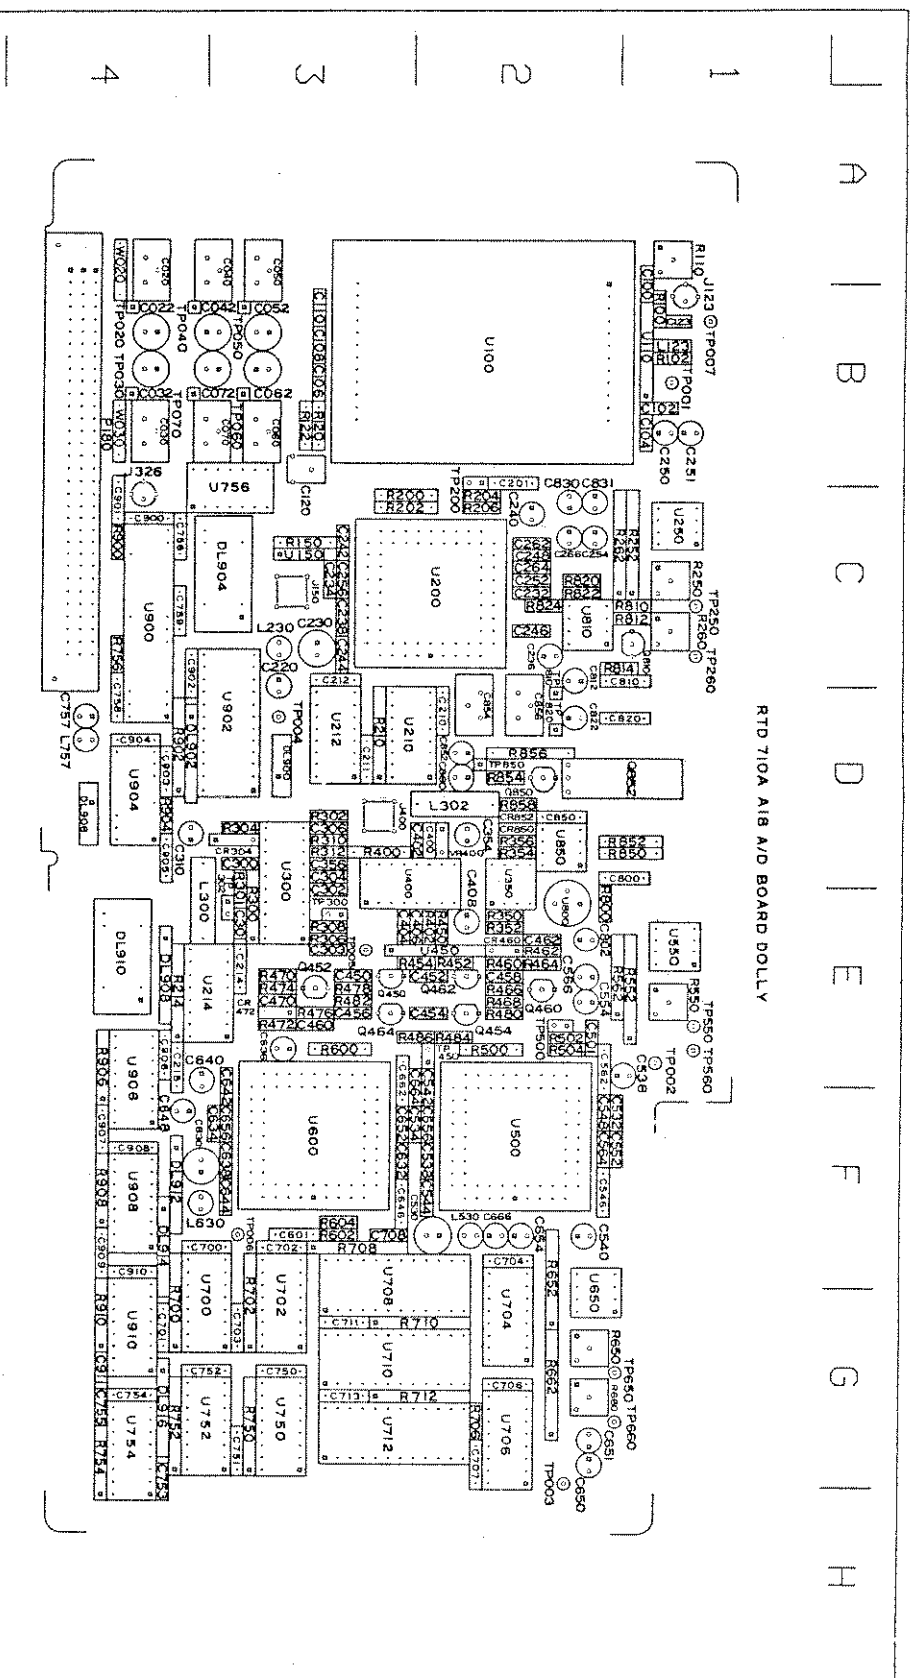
A18 A/D CIRCUIT BOARD ASSEMBLY.
